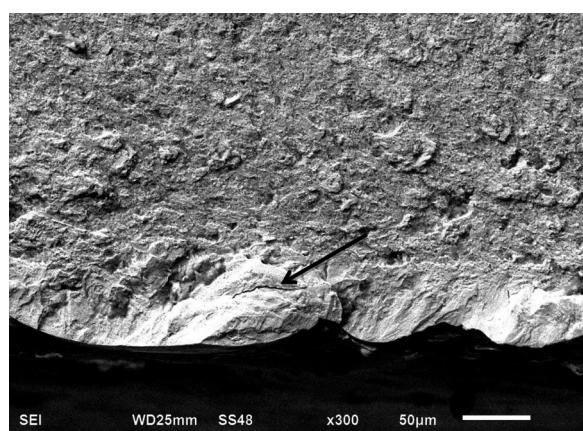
The magnified part of area marked in [Fig. 7](#). Origin of the fatigue fracture. The arrow indicates the micro crack. Scanning electron microscopy.
